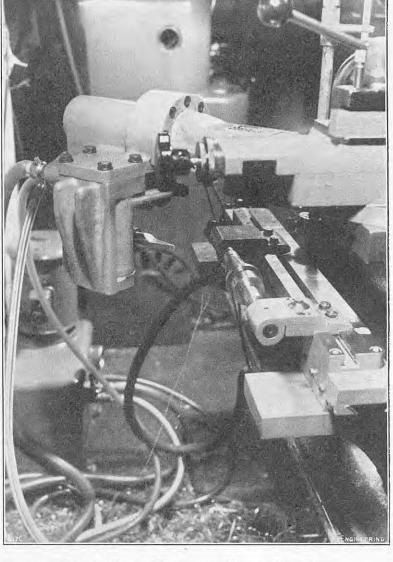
TRACER FINGER AND MASTER WORK-PIECE.
